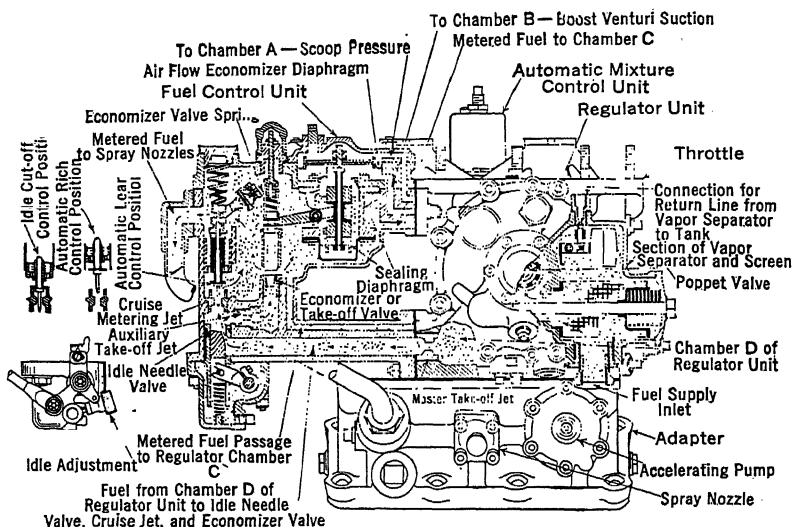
Top view of injection carburetor, showing sectional diagram of regulator unit.
